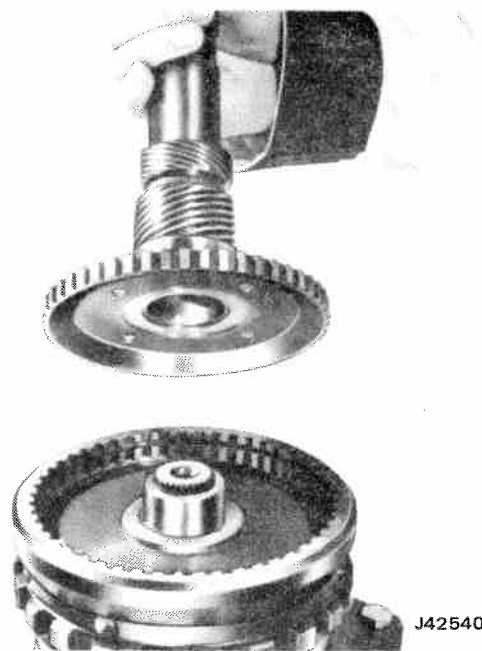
Installing Output Shaft Into Output Carrier Assembly
